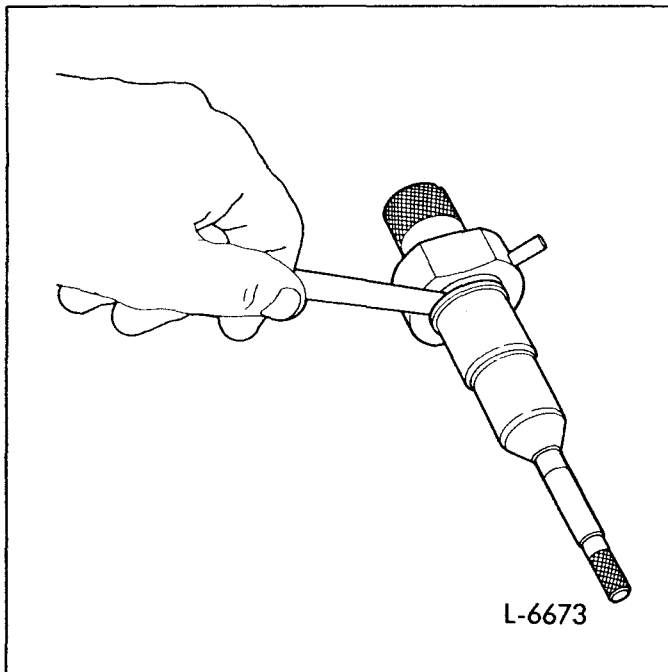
Measuring Clearance Between Installation Tool and Top of Hole Tube Flange
